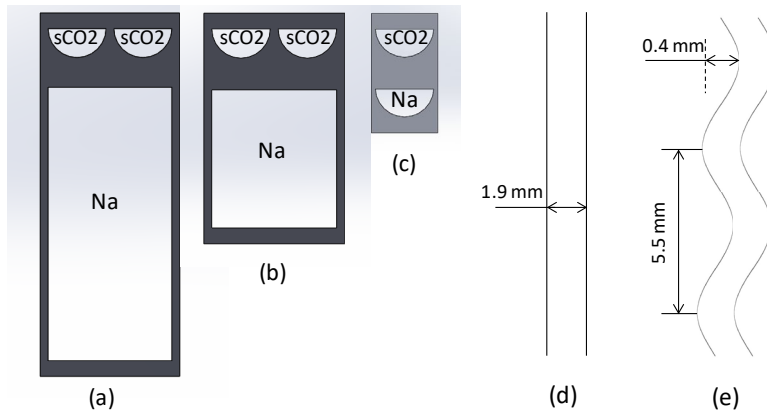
(a) Initial unit-cell design for a diffusion bonded H-CHX channels; (b) Modified unit cell design; (c) Final unit cell design; (d) Final design – straight channel; (e) Wavy channel
